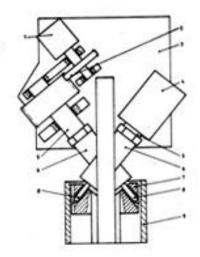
Principle assembly for brass deposition on a shaft (1 – surface active liquid; 2- brass rod; 3- shaft to be coated)
